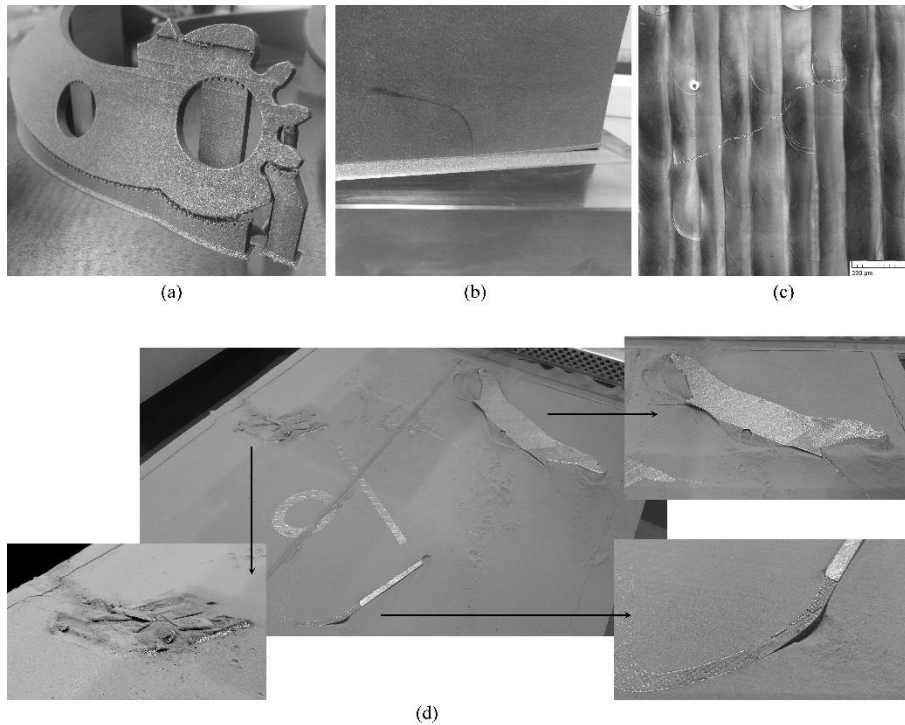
Defects in L-PBF parts during manufacturing: (a) delamination from the supports and deformation during processing Ti6L4V alloy; (b) delamination from the base plate and macrocracking in massive Ti6L4V solid sample; (c) cracks at the top surface of Ti-Al single layer; (d) general view of redistribution of powder bed during manufacturing: delamination from support and deformation resulting in contact with recoater: deformation of massive part (top image in d) and vibration of fine parts (bottom images)
